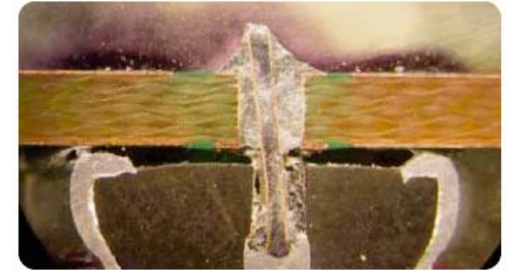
No fatigue cracks can be seen in the heel fillet of the joint at higher magnifications
